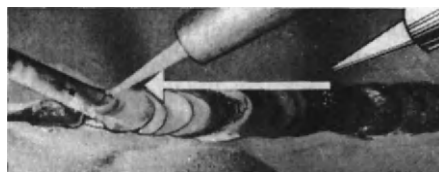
(c) The motion of the torch is straight along the weld, at constant height, without weaving.
